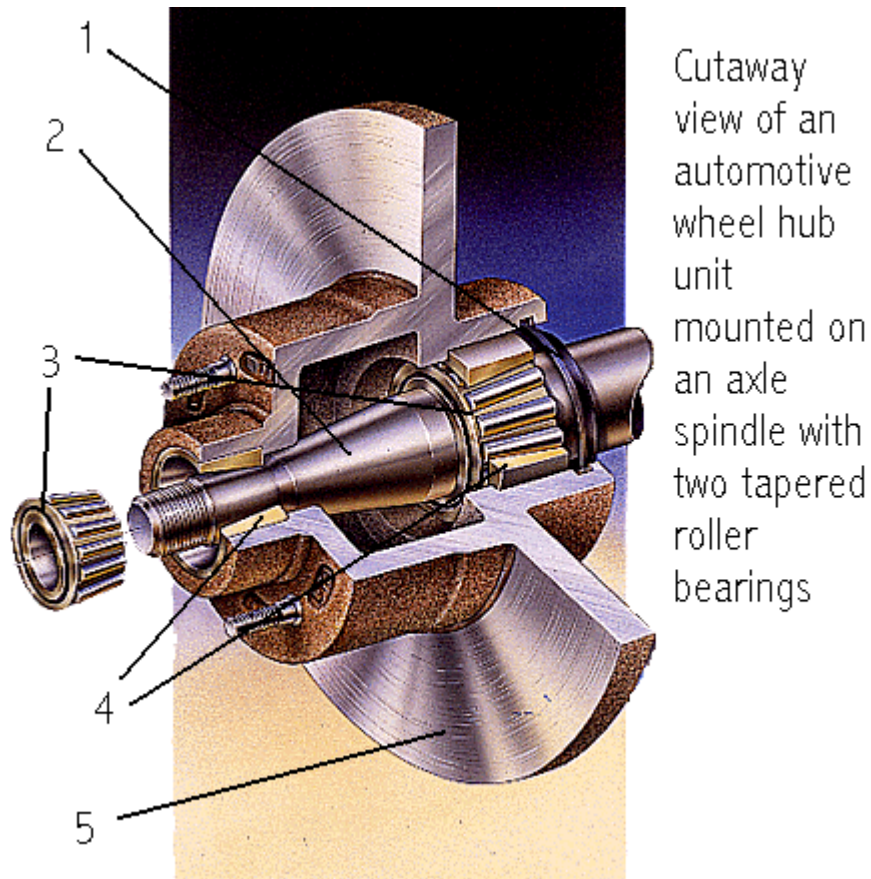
The parts shown are (1) grease seal, (2) axle spindle, (3) cone and tapered roller assemblies, (4) tapered roller bearing cups, and (5) wheel hub incorporating disk for disk brakes.
